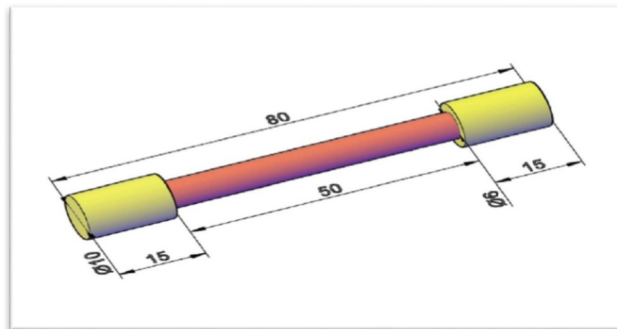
Dimensions of the tensile test bar specimen in millimeters along with a schematic representation.
